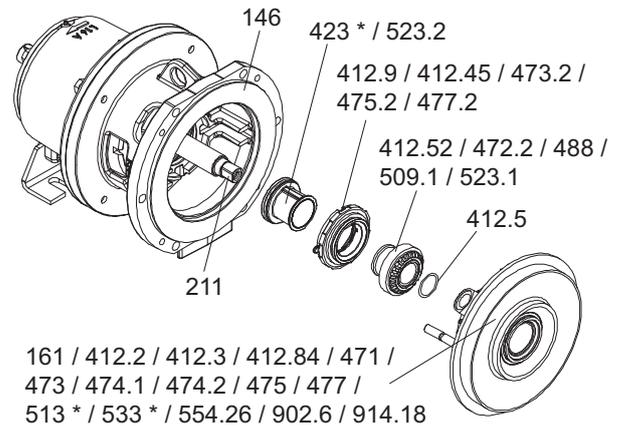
ALFA-KSS-RS/D cover casing sub-assembly, removing the atmosphere-side shaft sleeves and atmosphere-side mechanical seal
